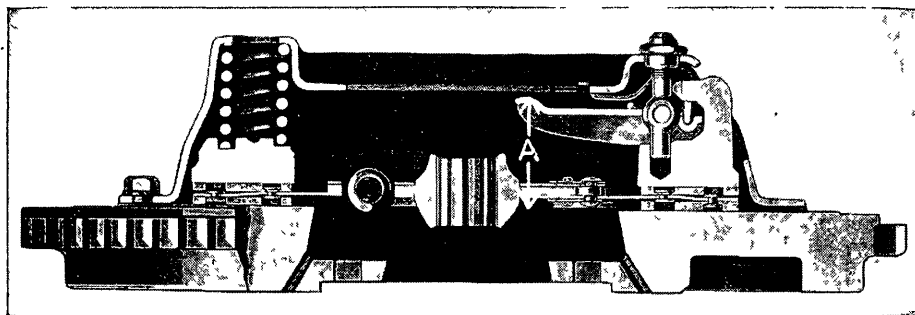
B rg & Beck. Table below gives release lever height setting as indicated by dimension "A". All levers must be parallel within .005 inch. Cover number is stamped on flange inside cover
